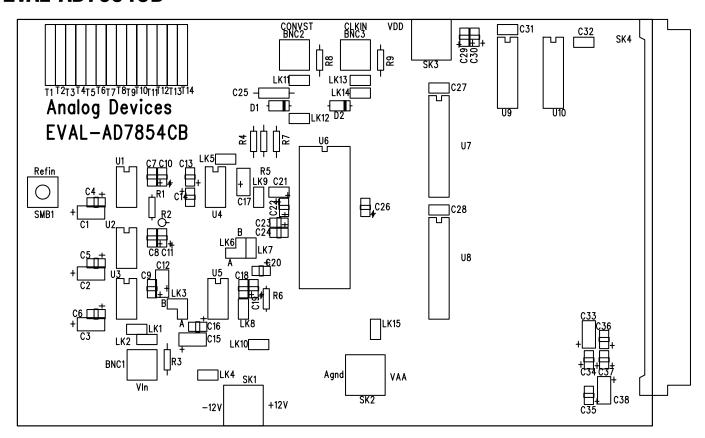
AD7854 Evaluation Board Component Placement Drawing.
